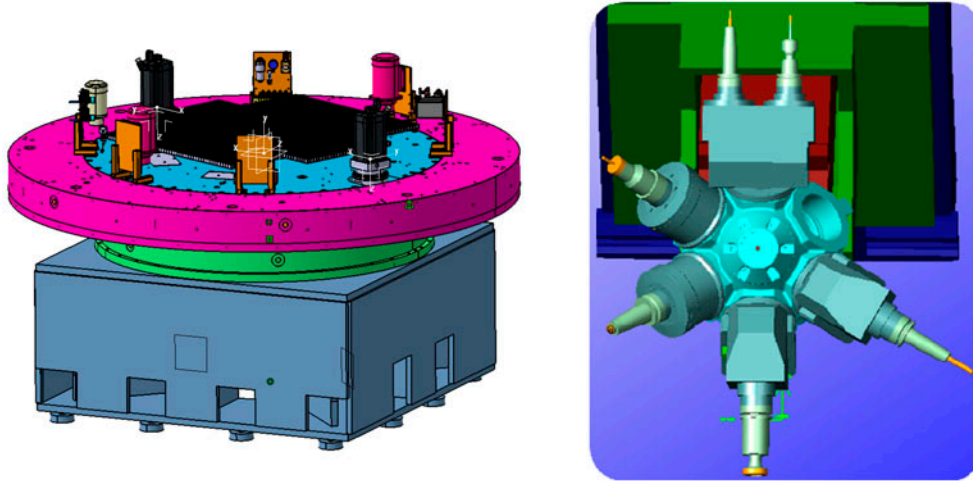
A rotary table and a turret with five machining units: one of them holds two spindles.
